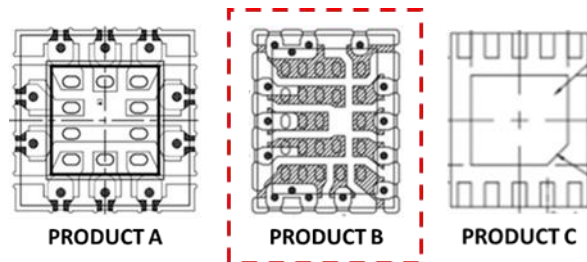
Package Comparison, there were 3 packages that could be compared, only Product B has reported die crack issue. Same thickness of 0.55 but 2x2 in size, no die crack. Same package size of 2.5x2 but thicker at 0.75, no die crack. Only 2.5x2x0.55 has die crack.
